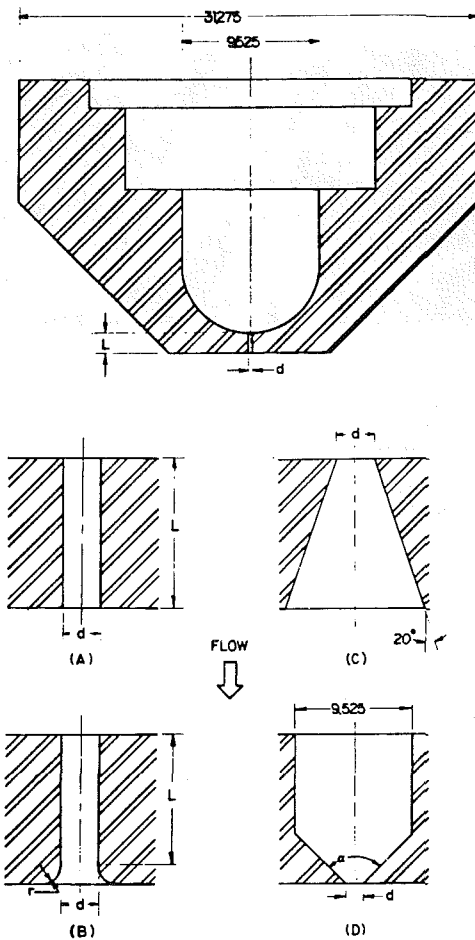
Nozzle piece with details of nozzle geometries, unit: mm
